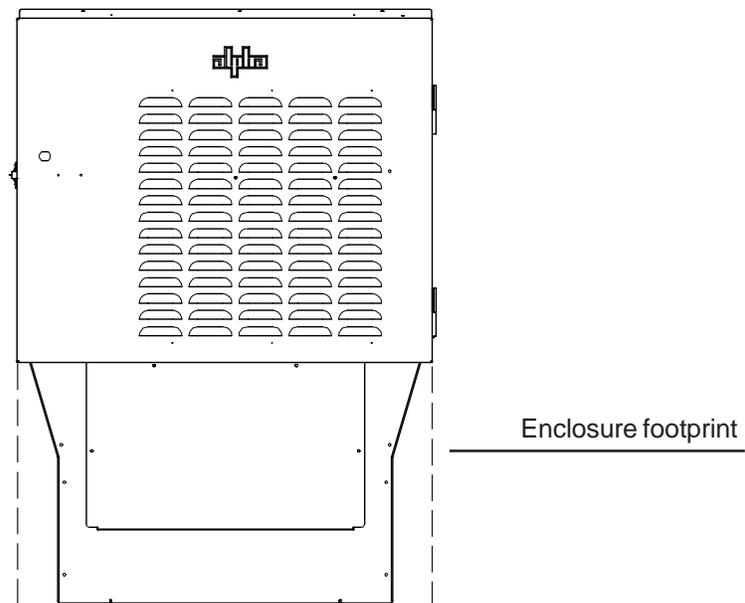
, PWE-6FT Enclosure Mounted to Pedestal
